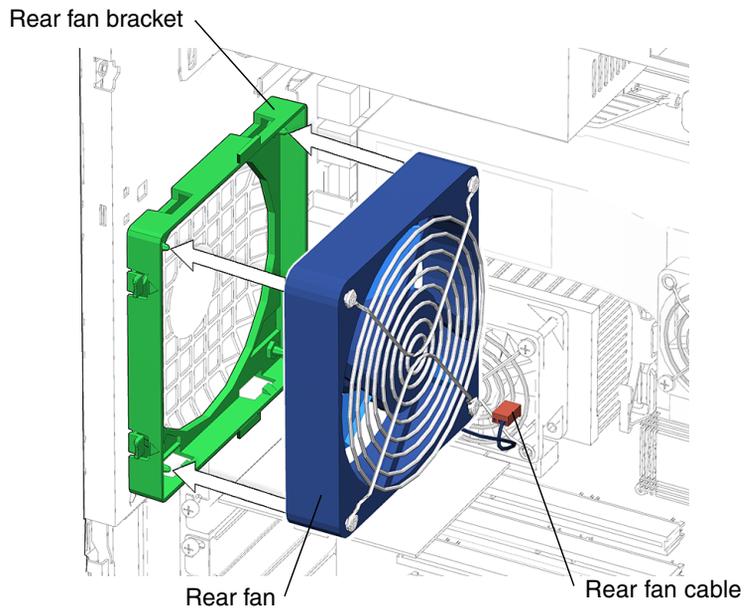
Installing the Rear Fan Into the Rear Fan Bracket
